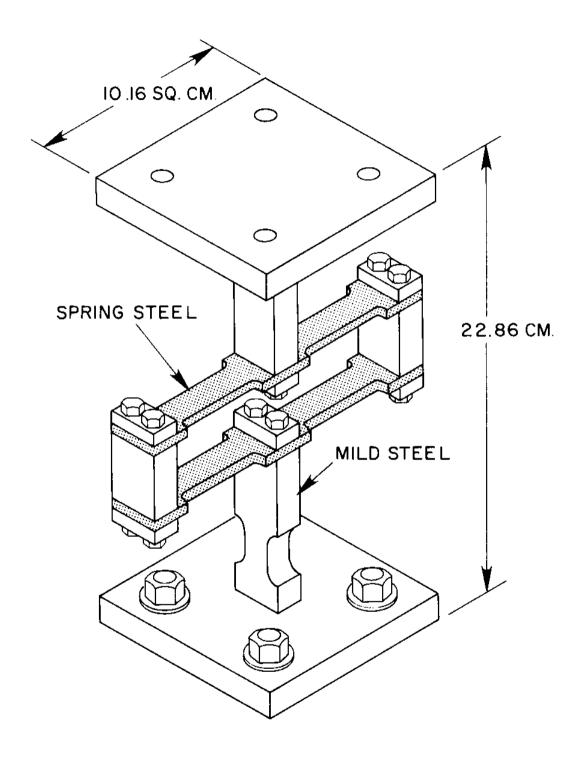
A TYPICAL FOUNDATION SPRING
